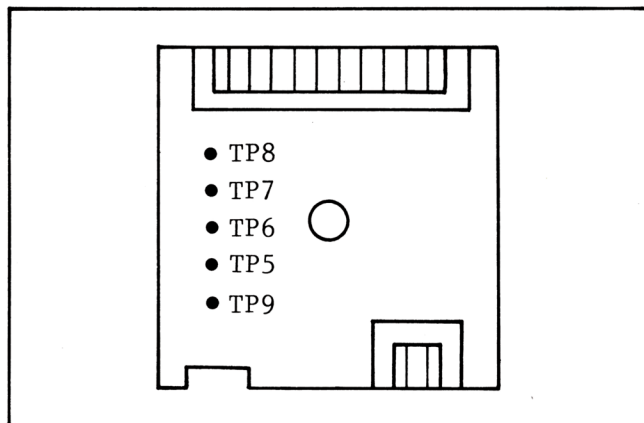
HEAD CONNECTION P.C.B.
